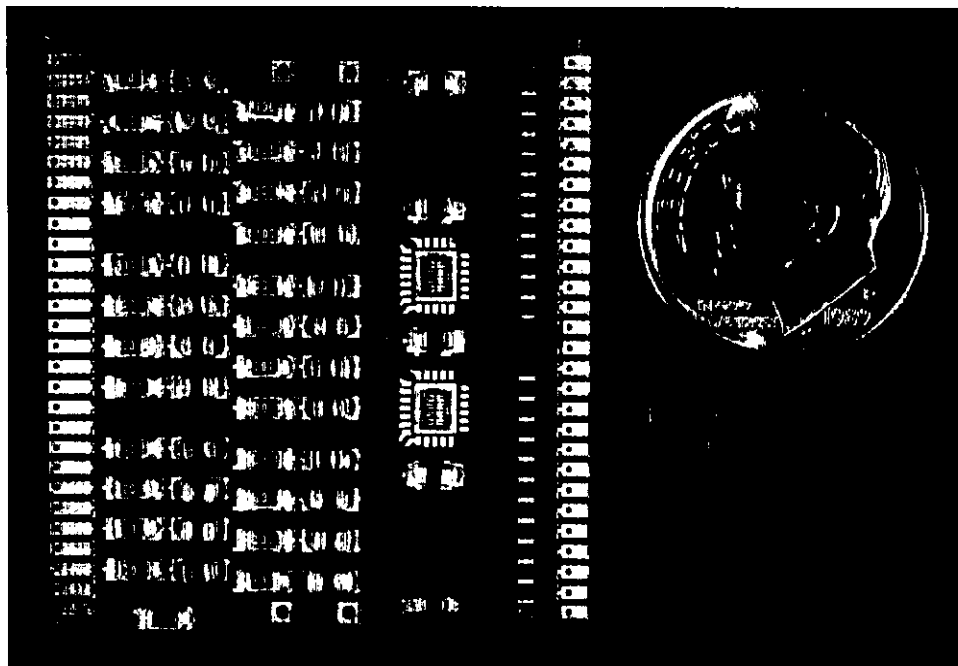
24 Channel Preamplifier Assembly Using VTX Chips With COB
